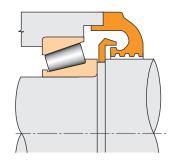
Machined umbrella flinger combined with annular grooves.
